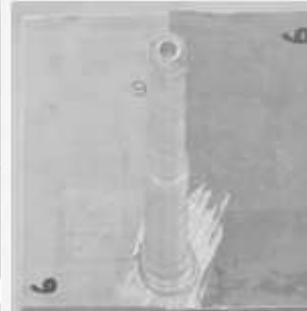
Welded plate using the rotational speed of 1000 rpm
